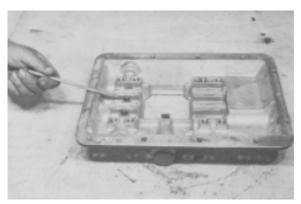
Position crossover interlock balls in cover cross bores. 2 balls in cover cross between 1st & Reverse rail groove, and 2nd & 3rd rail groove and 2 balls in cover cross bore between 2nd & 3rd rail groove, and 4th & 5th rail groove. (See cross section Figure 78-A)
